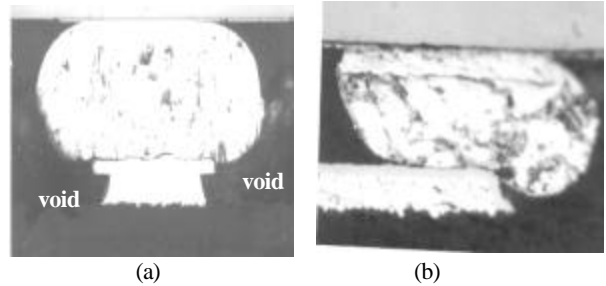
Cross-section view of (a) bump crack (TV3) (b) dry joint (TV4)
